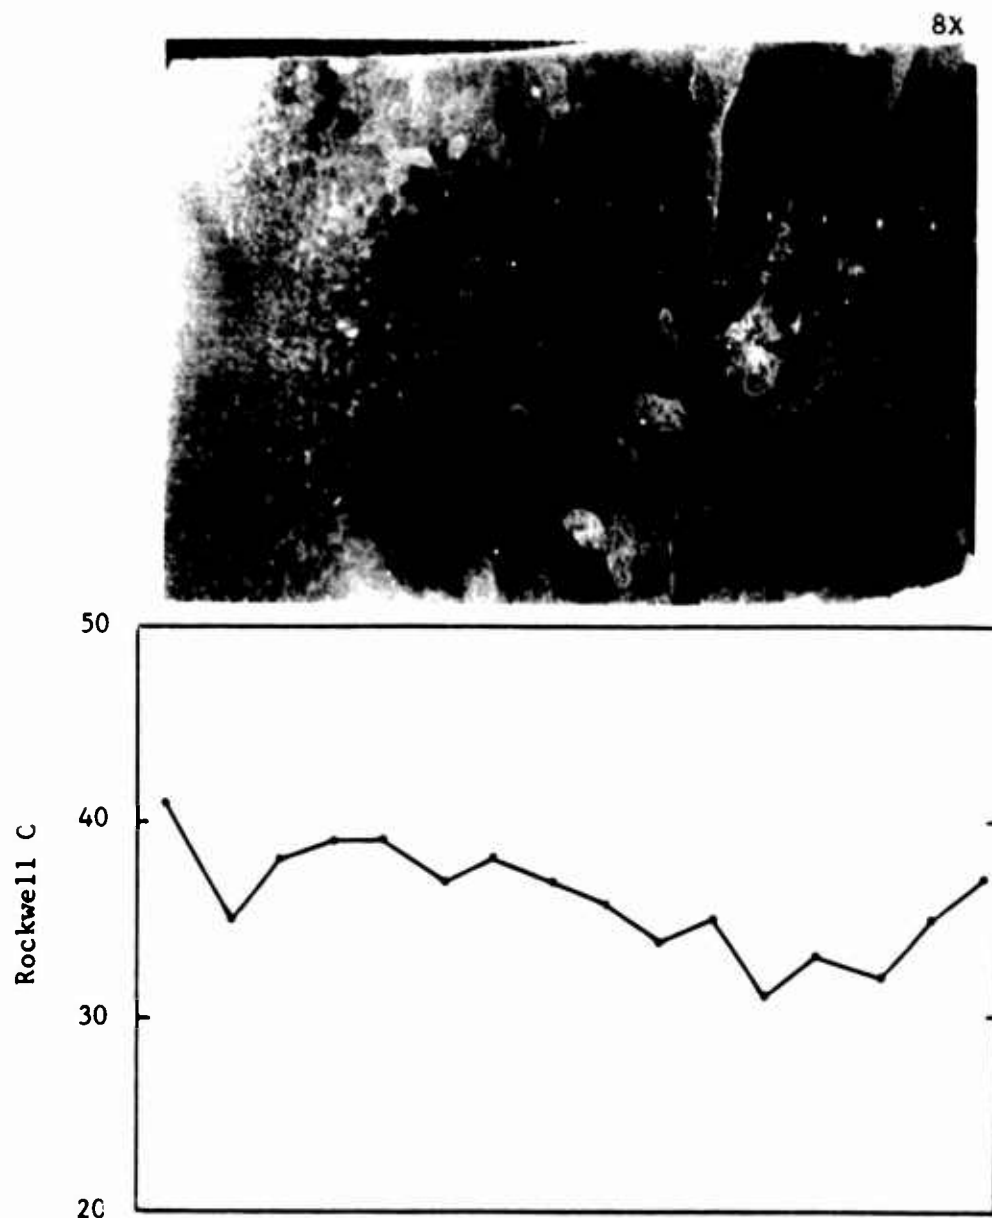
MACROSTRUCTURE AND HARDNESS MEASUREMENTS IN AN AUTOMATIC GTA WELD USING 100% Ti-75A FILLER METAL
